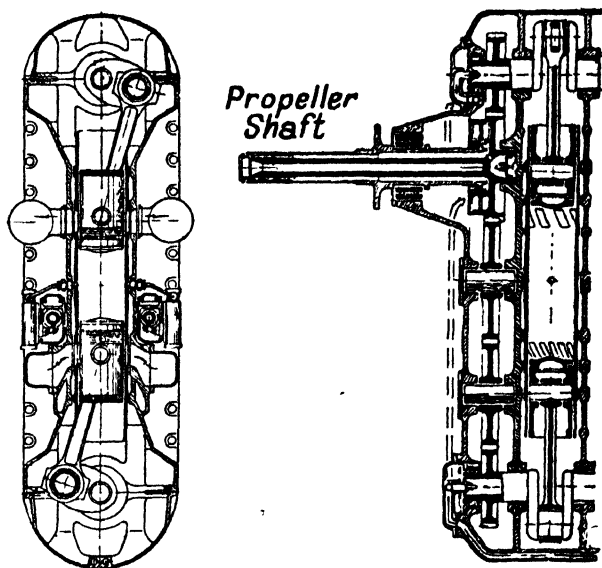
GEARED DRIVE MODEL JUNKER'S AIRCRAFT ENGINE
